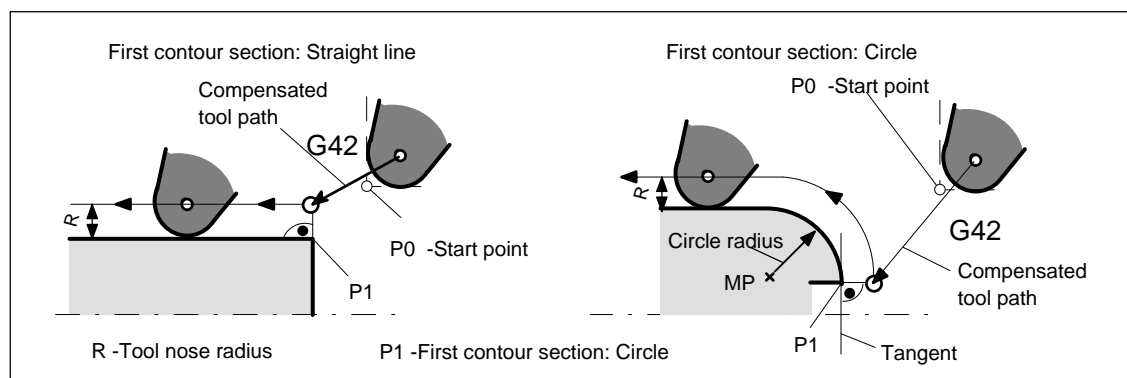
Beginning of tool radius compensation –example shows G42, tool point direction =3
